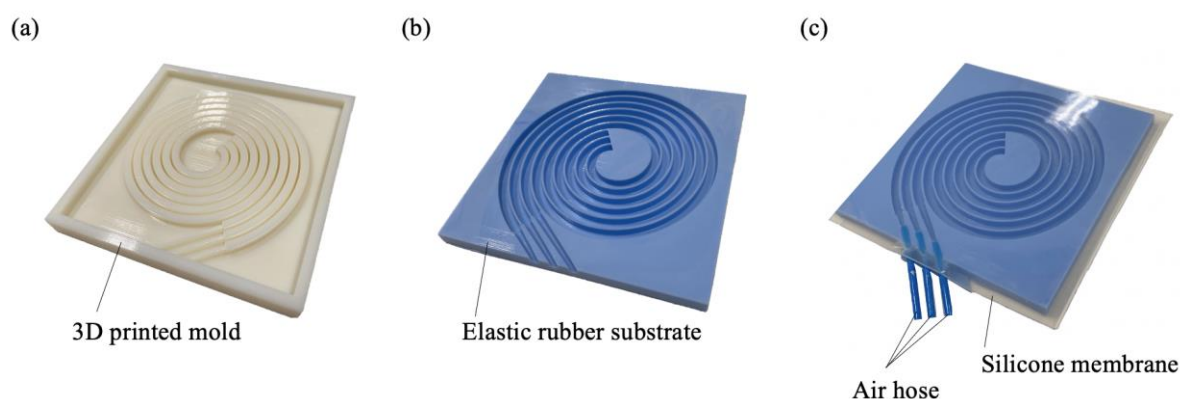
Fabrication process: (a) 3D printing of the mold, (b) rubber molding, and (c) direct bonding via atmospheric plasma treatment
